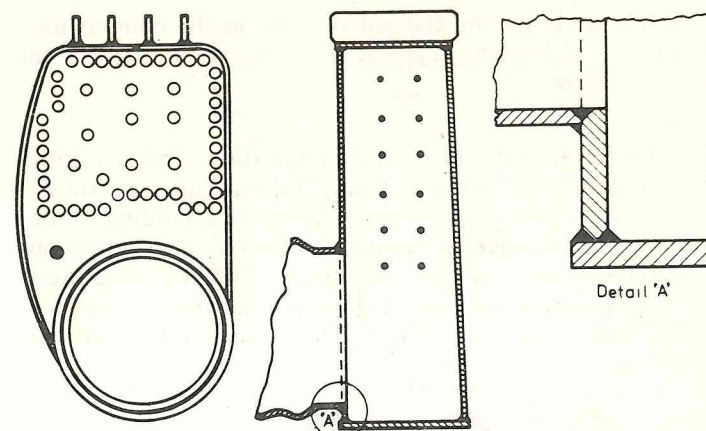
(b) Alternative method of construction for all welded combustion chamber with detail of furnace attachment
